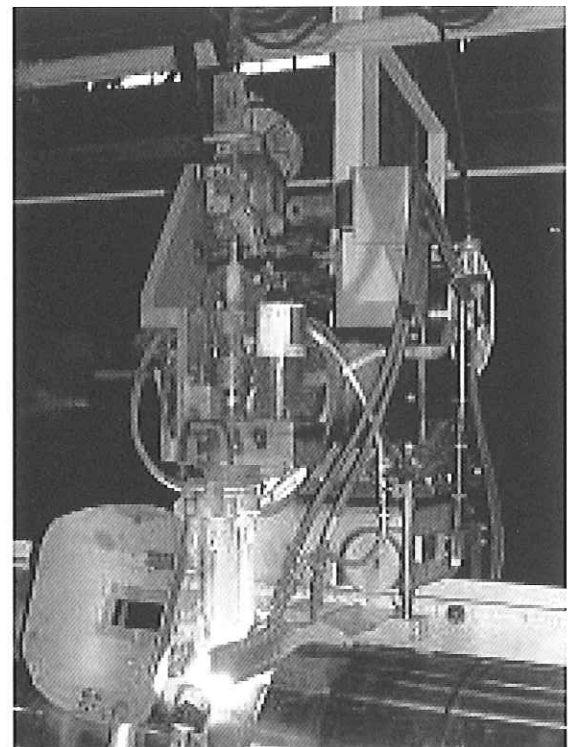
Narrow gap welding equipment with high speed rotating arc
